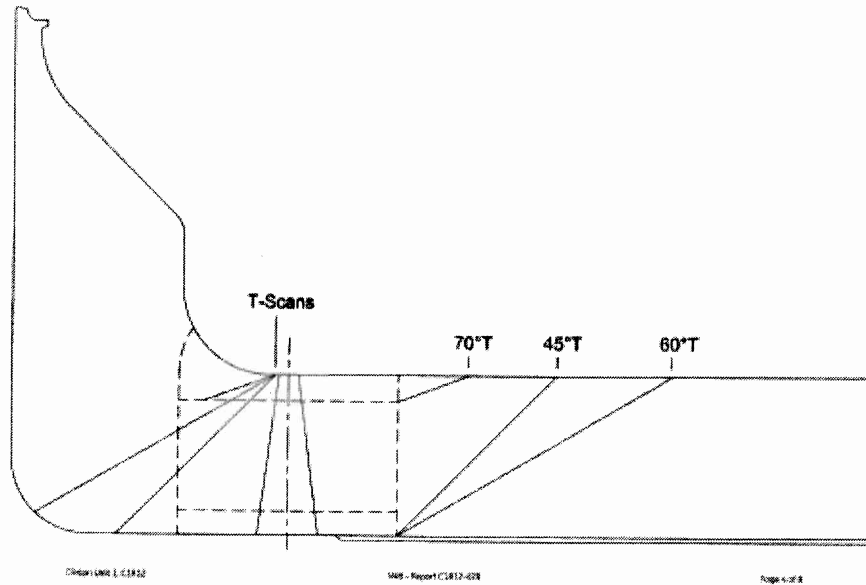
Nozzle to Shell Weld (Typical)
